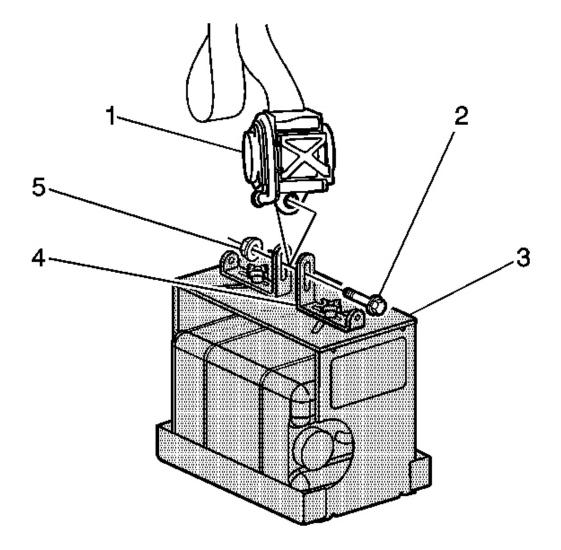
Seat Belt Pretensioner & SIR Deployment Fixture Courtesy of GENERAL MOTORS CORP.
